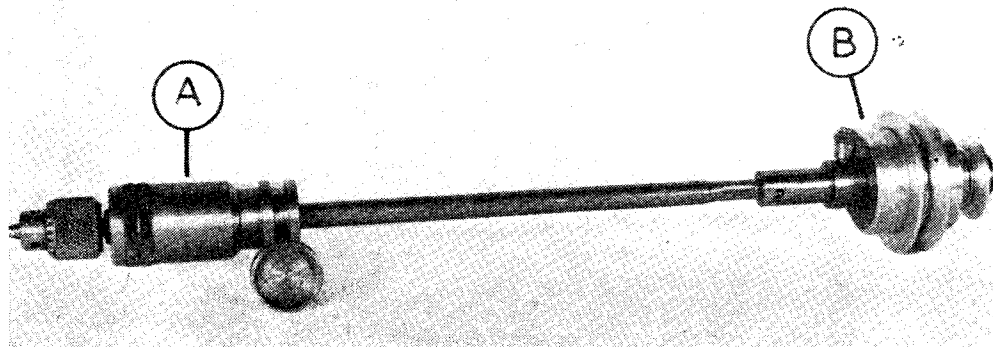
(A)—The drilling head and spindle. (B)—The driving pulley and adapter
